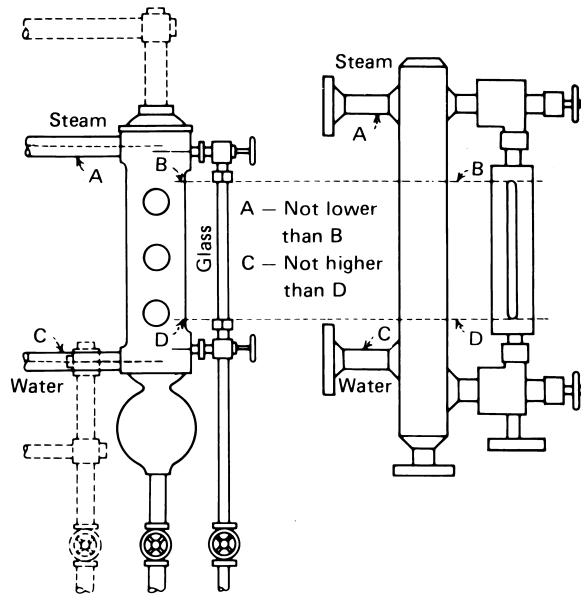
TYPICAL ARRANGEMENT OF STEAM AND WATER CONNECTIONS FOR A WATER COLUMN
